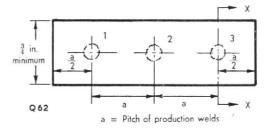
Dimensions for spot welding a macro test piece.
